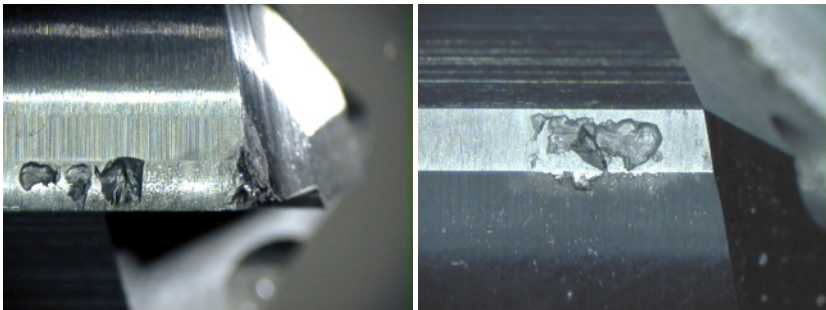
Scoring marks on the side cutting edge due to insufficient backtaper
